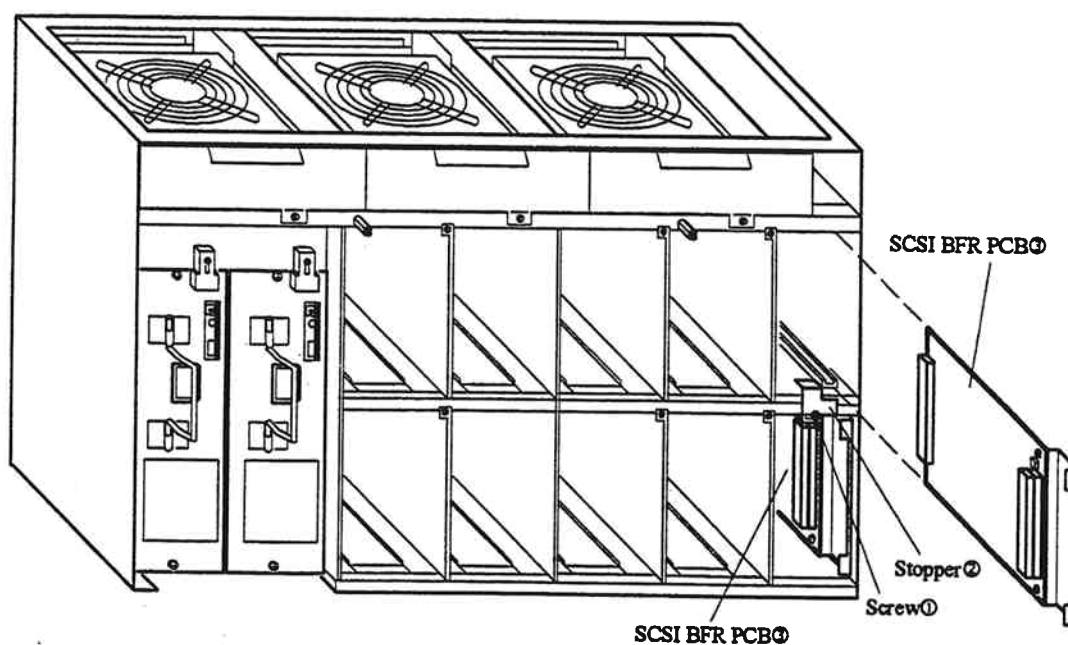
Removal of the SCSI BFR PCB
